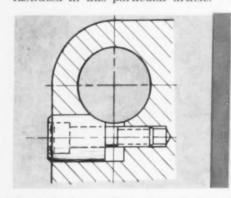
In the application shown in this sketch, a single clamp is utilized.
